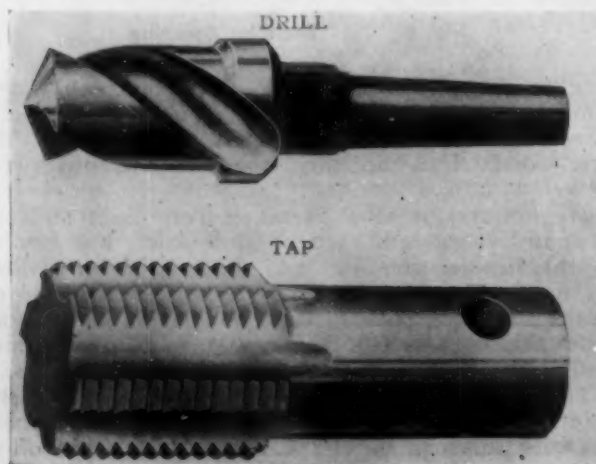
Drill and Tap for Attaching Wood Blocks to the Lathe
